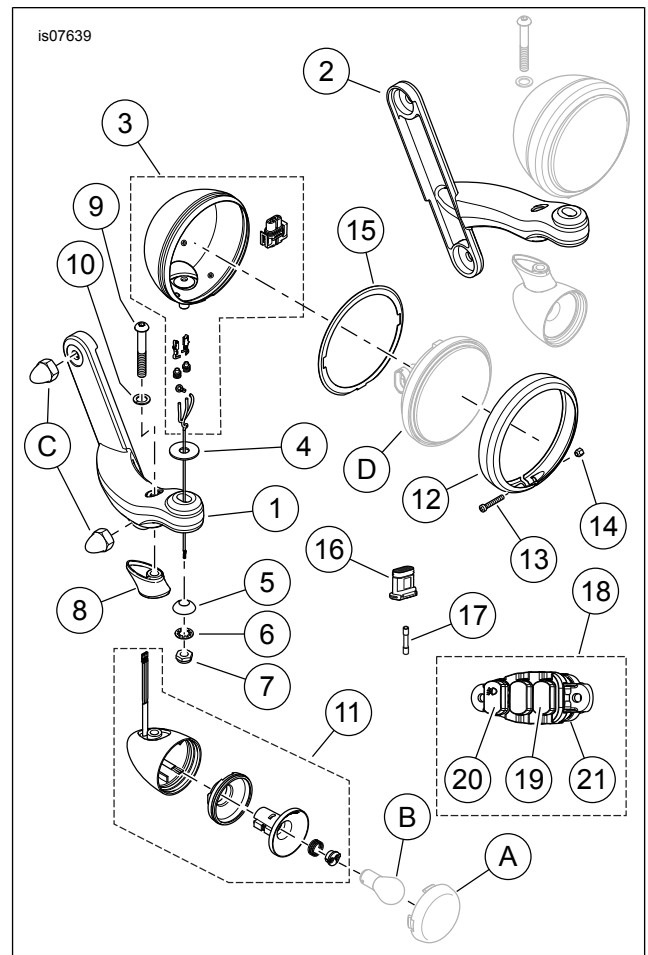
Service Parts, Custom Auxiliary Forward Lighting Kits
